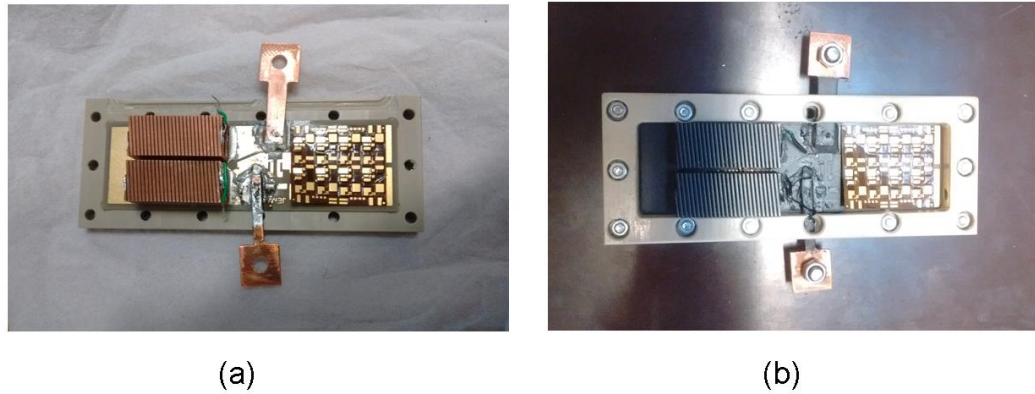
Assembling the cooler system and the DBC with the inductors. (a) Before painting the inductor and attach the top cover. (b) After painting the copper surfaces and attaching the cover.
